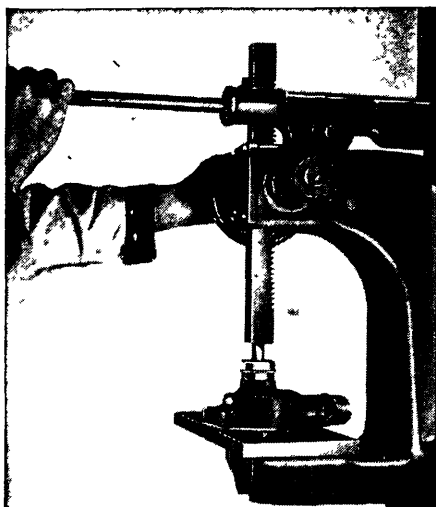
C Pressing water pump shaft and hub into impeller. 1937-52
